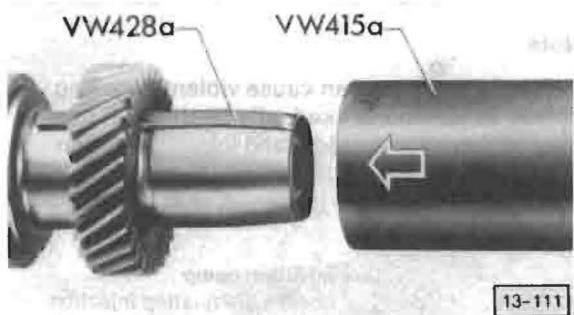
Distributor drive gear/crankshaft timing gear, removing
